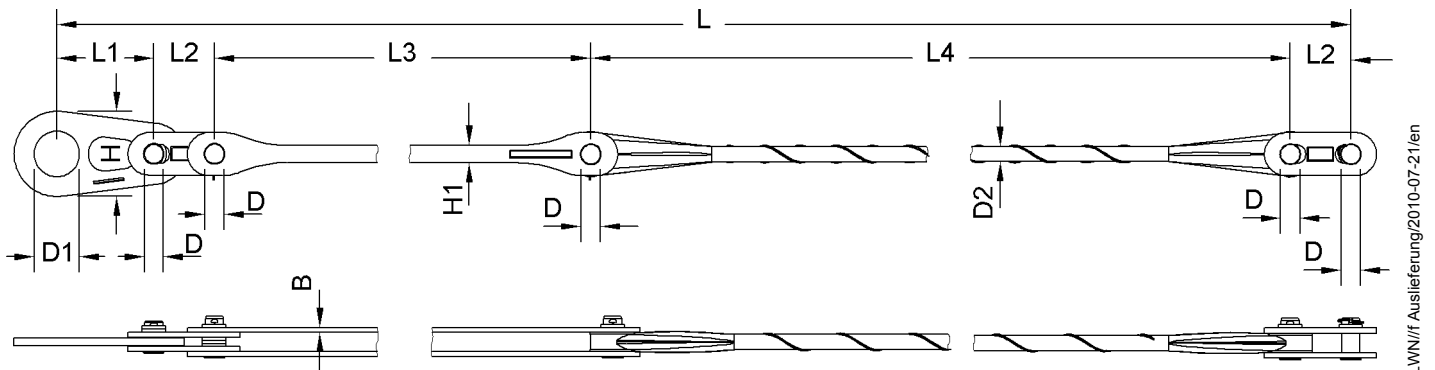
Dimensions of jib pendant strap on 2316 jib head section
